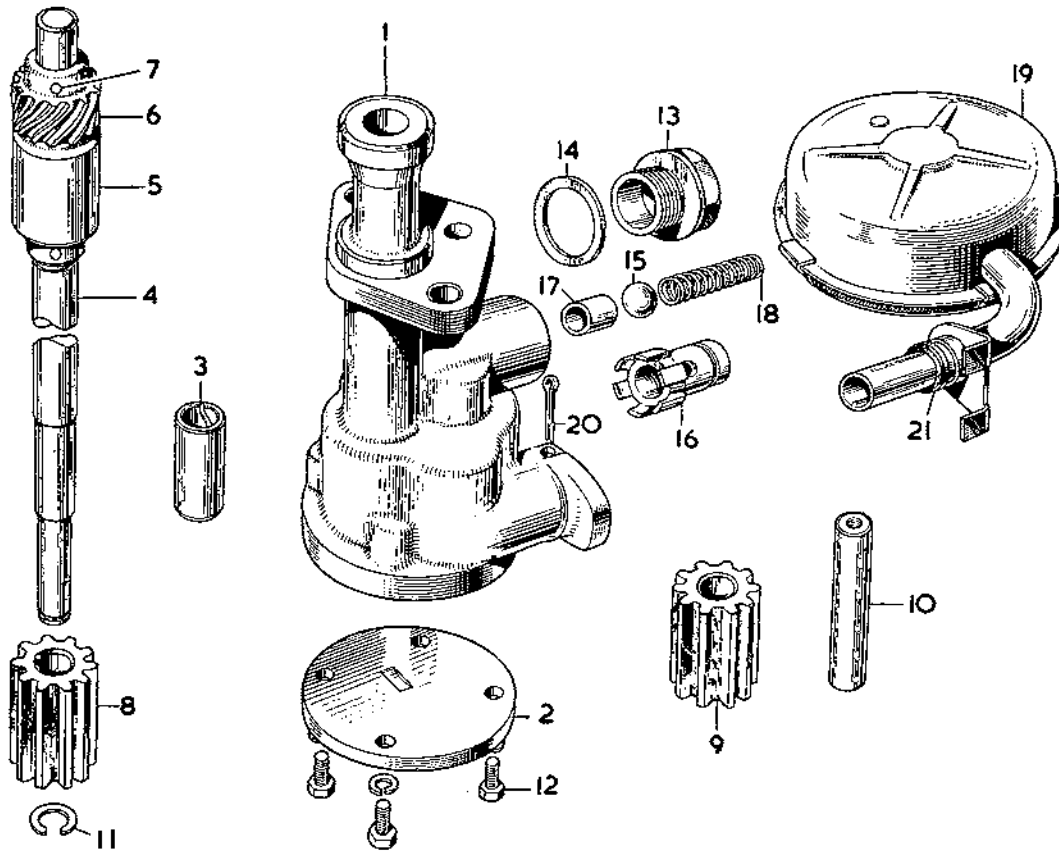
COMPONENT PARTS OF THE OIL PUMP.
